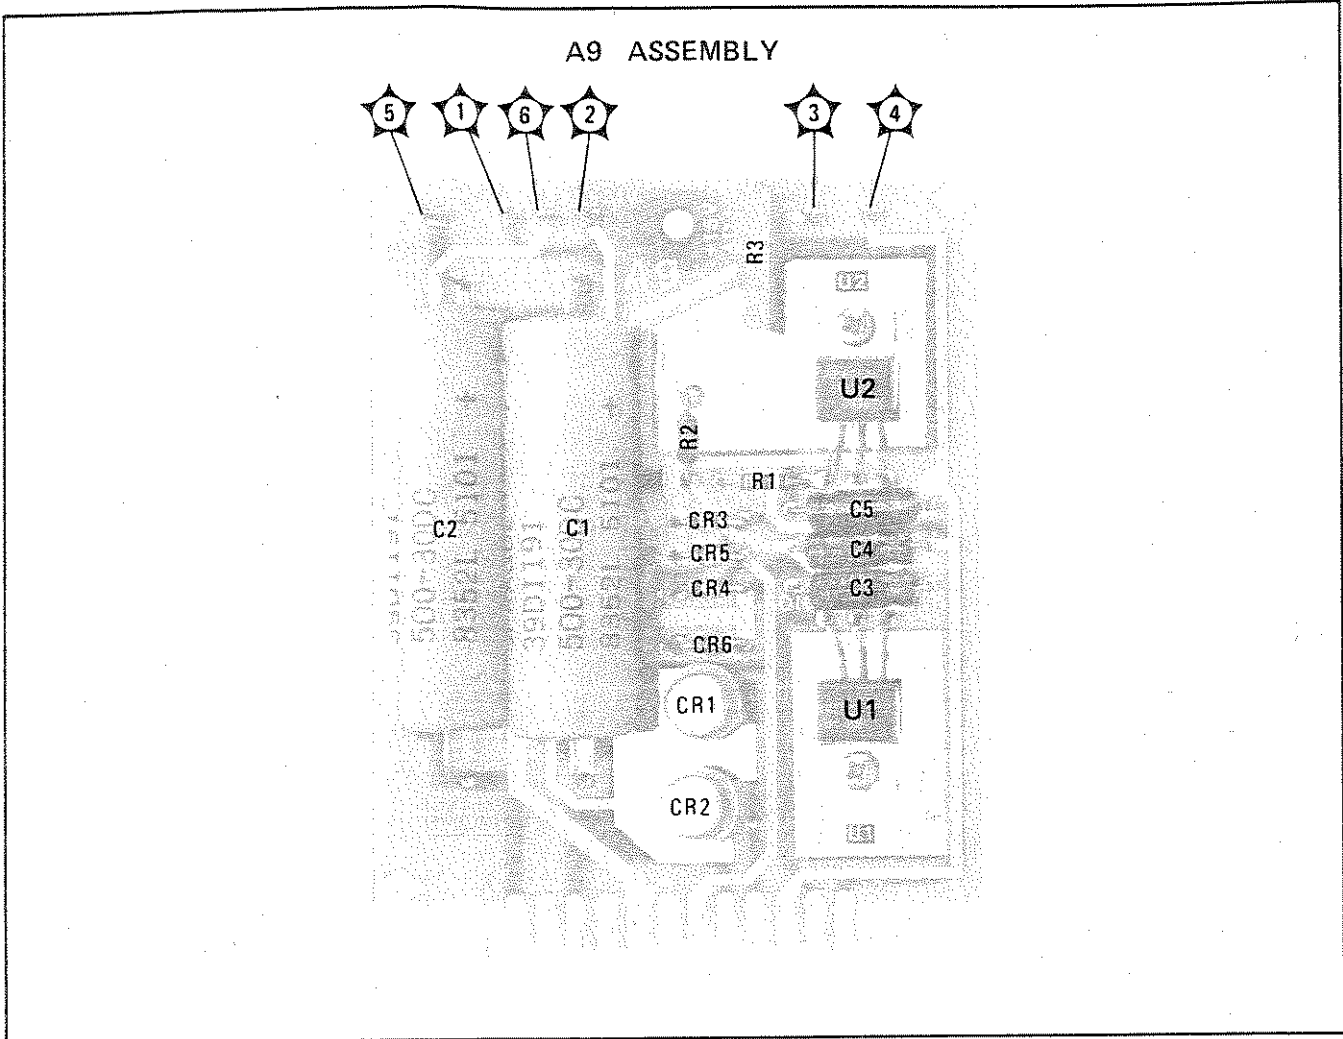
A9 Power Supply Rectifier and Regulator Assembly Component and Test Point Locations
